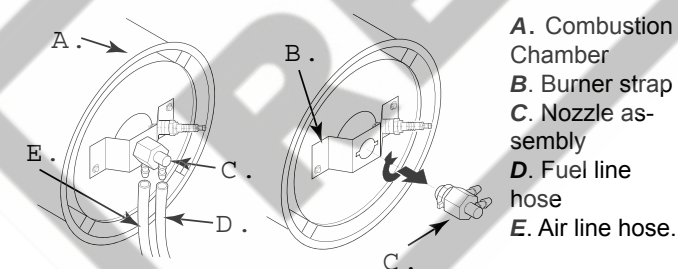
Removing air and fuel line hoses, 35.000 Btu/Hr Model.
